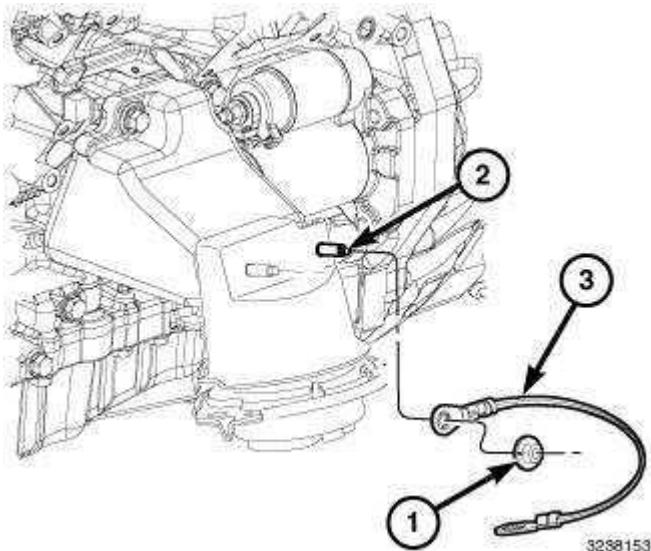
Suppression Retainer And Driver Side Engine Mount Stud
